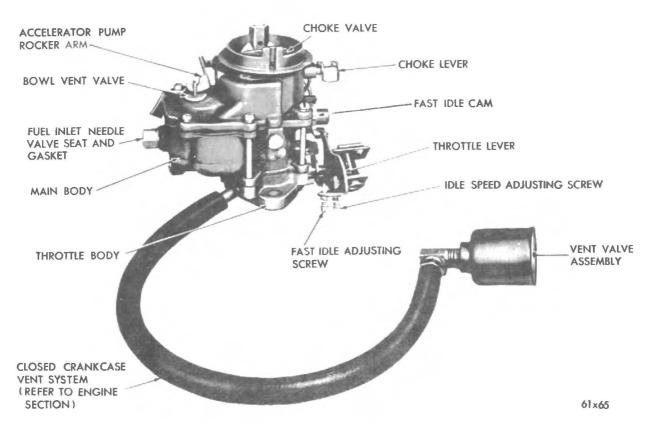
Carburettor assembly (BBS series) with closed crankcase vent (typical).
